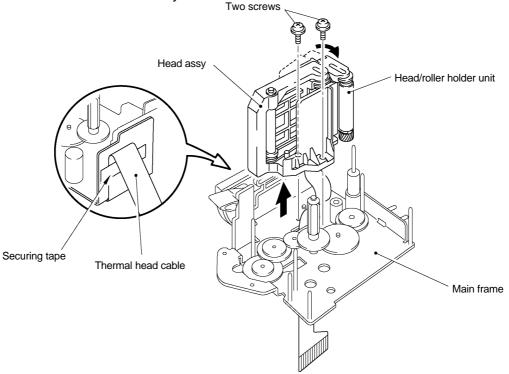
Removing the Head/Roller Holder Unit
